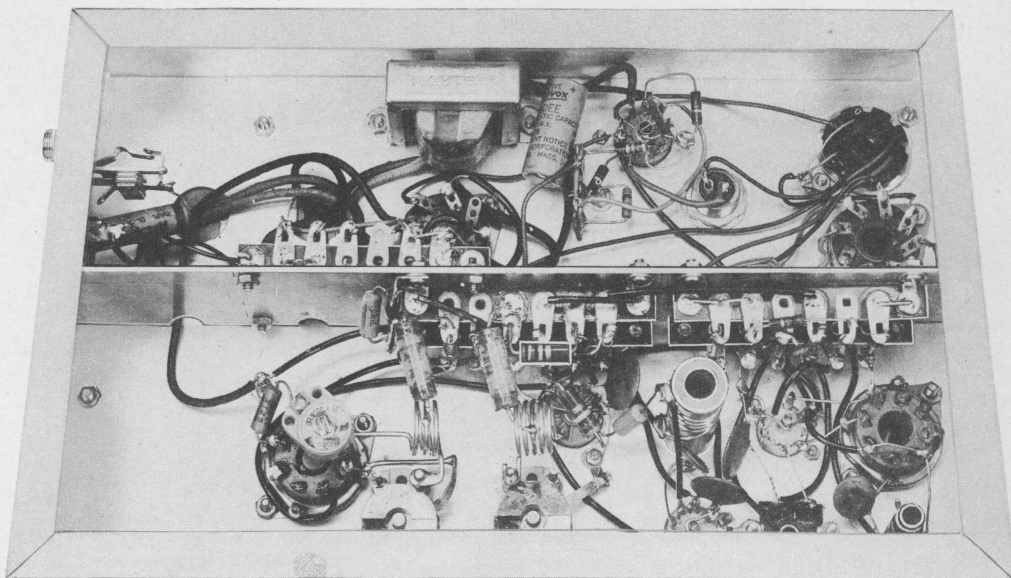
Bottom view of the transmitter. The resistor board provides the necessary mechanical support for mobile operation.
